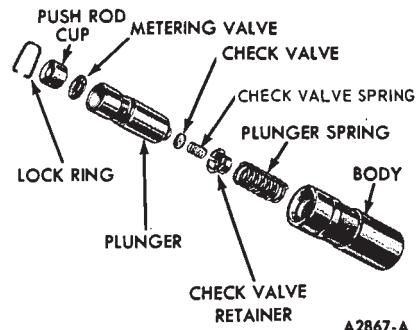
Type I Hydraulic Valve Lifter Assembly
